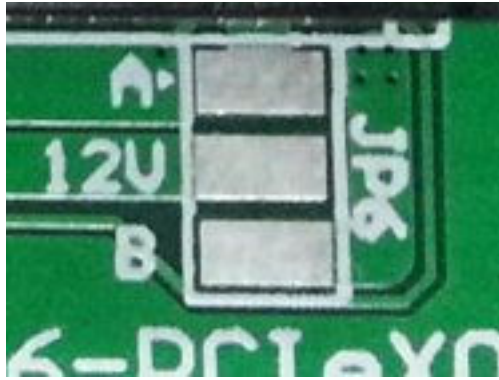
JP6 soldering can select 12V PCIe power supply to host/device side
